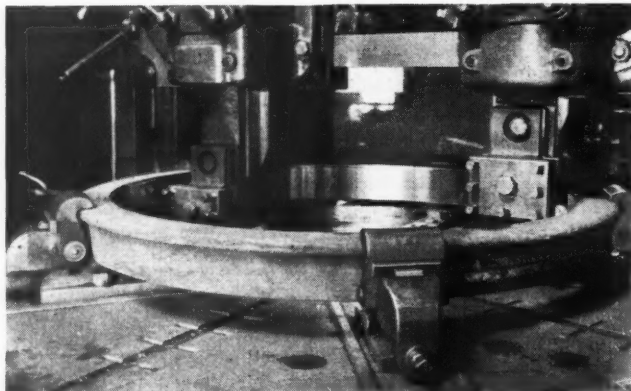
Fast, positive action is the feature of the jaws by which the tire is clamped to this boring mill table.
